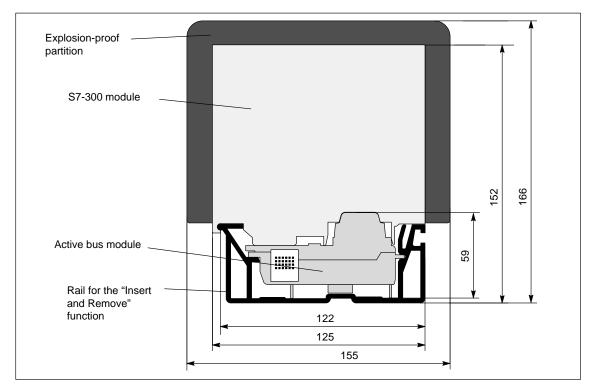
Complete Dimension Drawing of a Rail for "Insert and Remove" Function with Active Bus Module, S7-300 Module and Explosion-proof Partition
